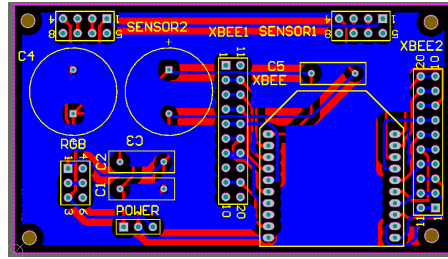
Bottom Layer of Sensor Circuit PCB
